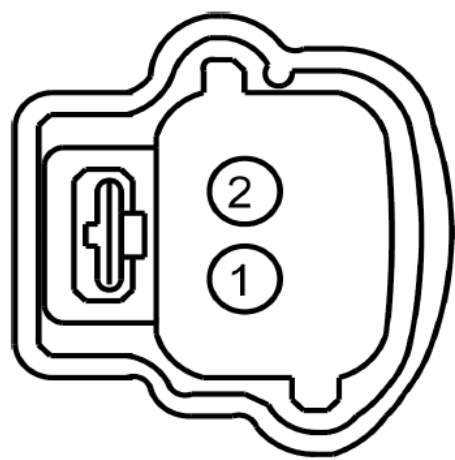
Windshield Washer Pump Motor Connector End View (C137)
